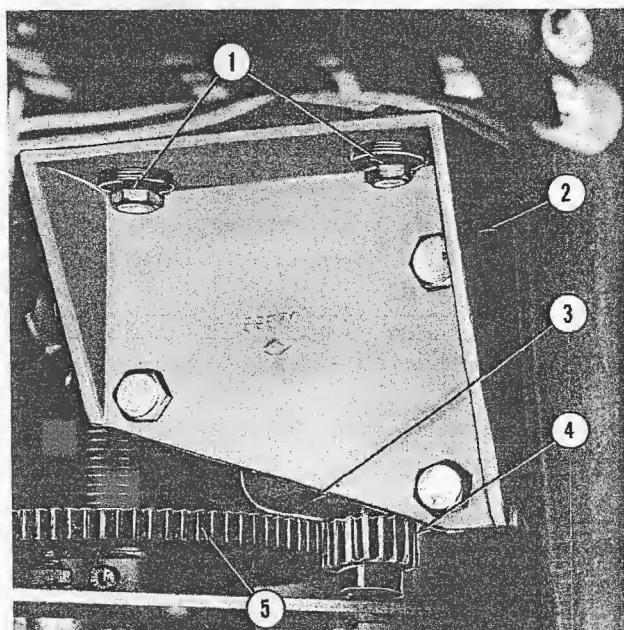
CHANGER MOTOR PINION AND SELECTOR GEAR ADJUSTMENT
